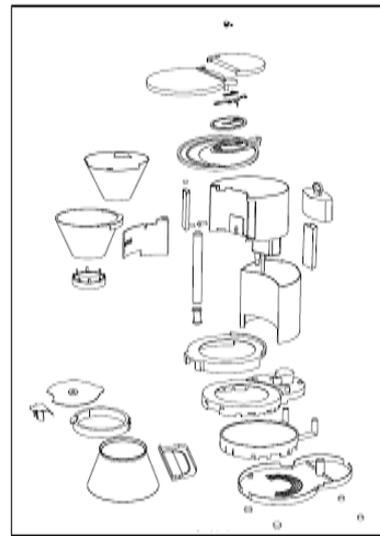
Explode Drawing of Coffee Maker Using CATIA Software
